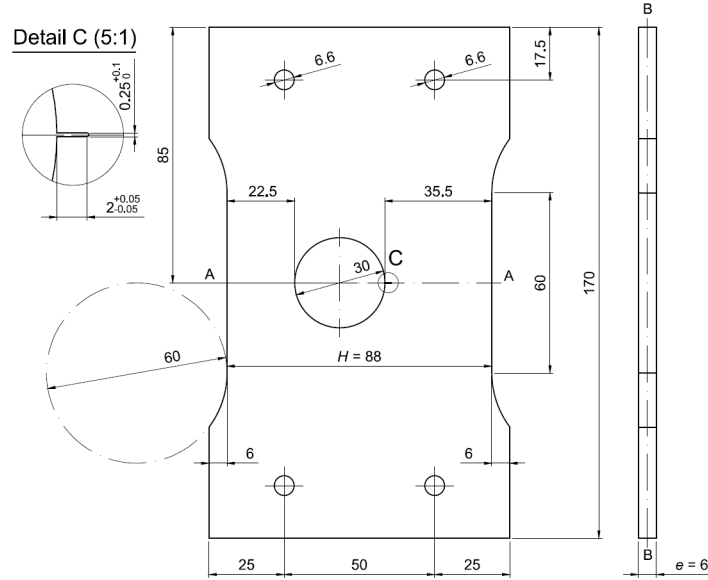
Geometry of the tested components. Dimensions in millimeters.
